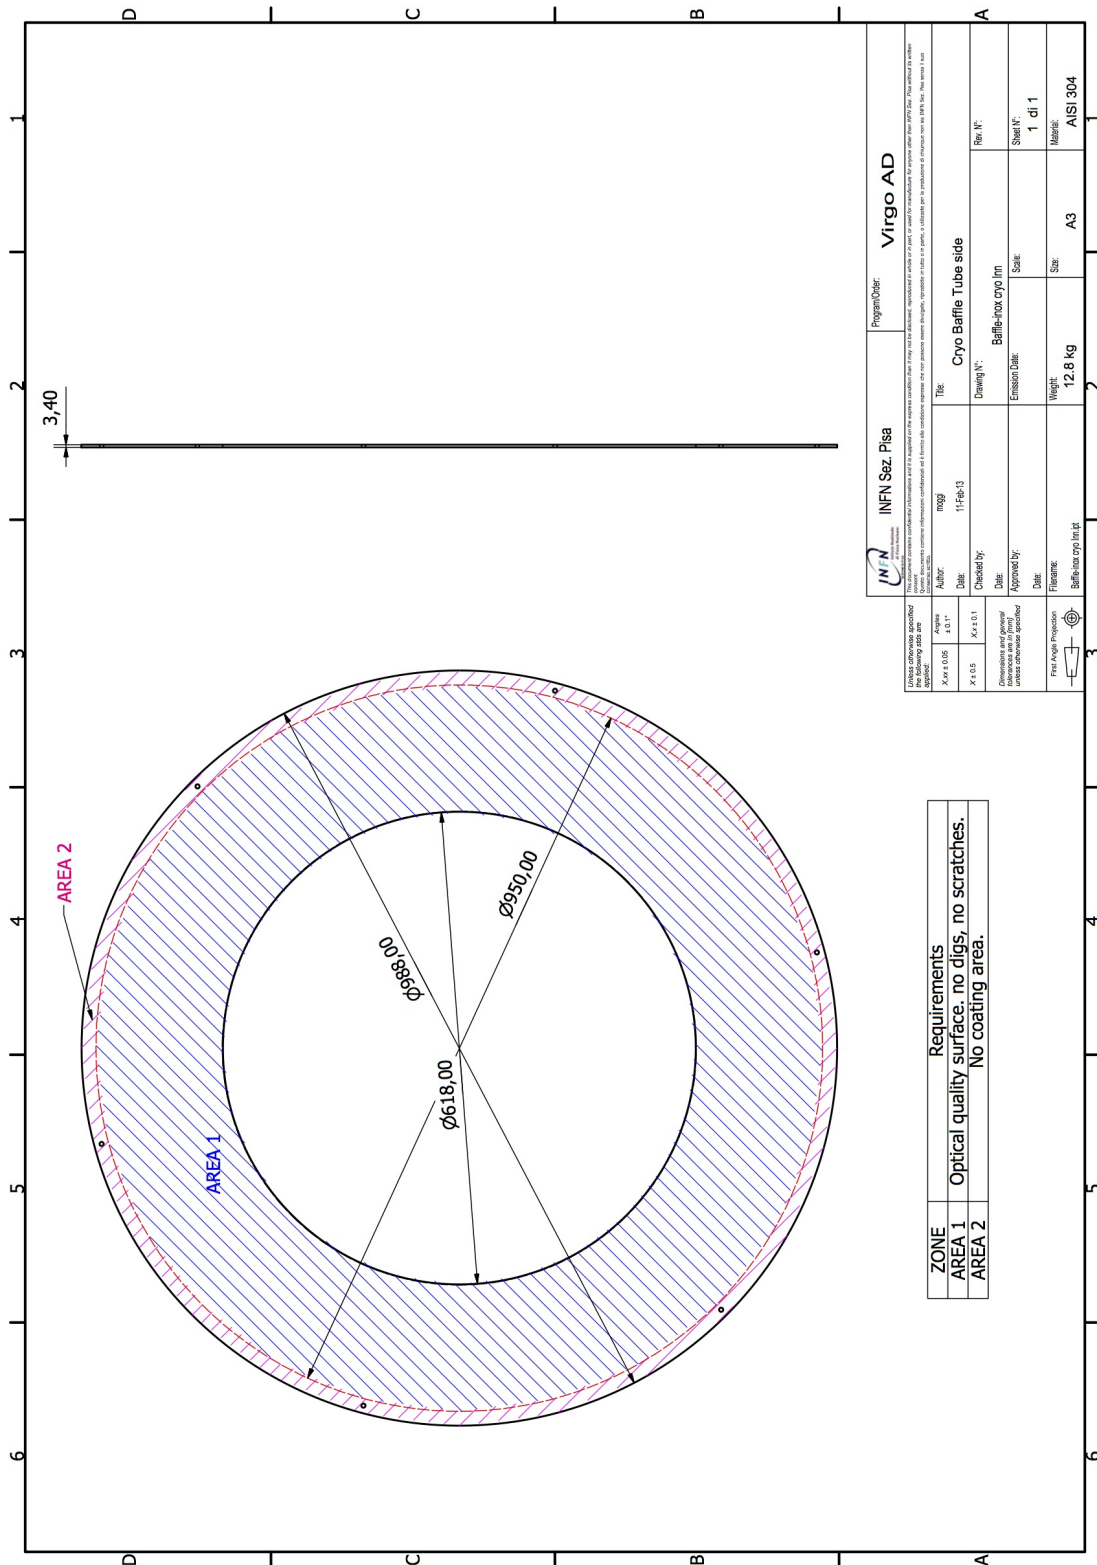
Draft of the technical drawing for the realization of the Baf_Tow.
